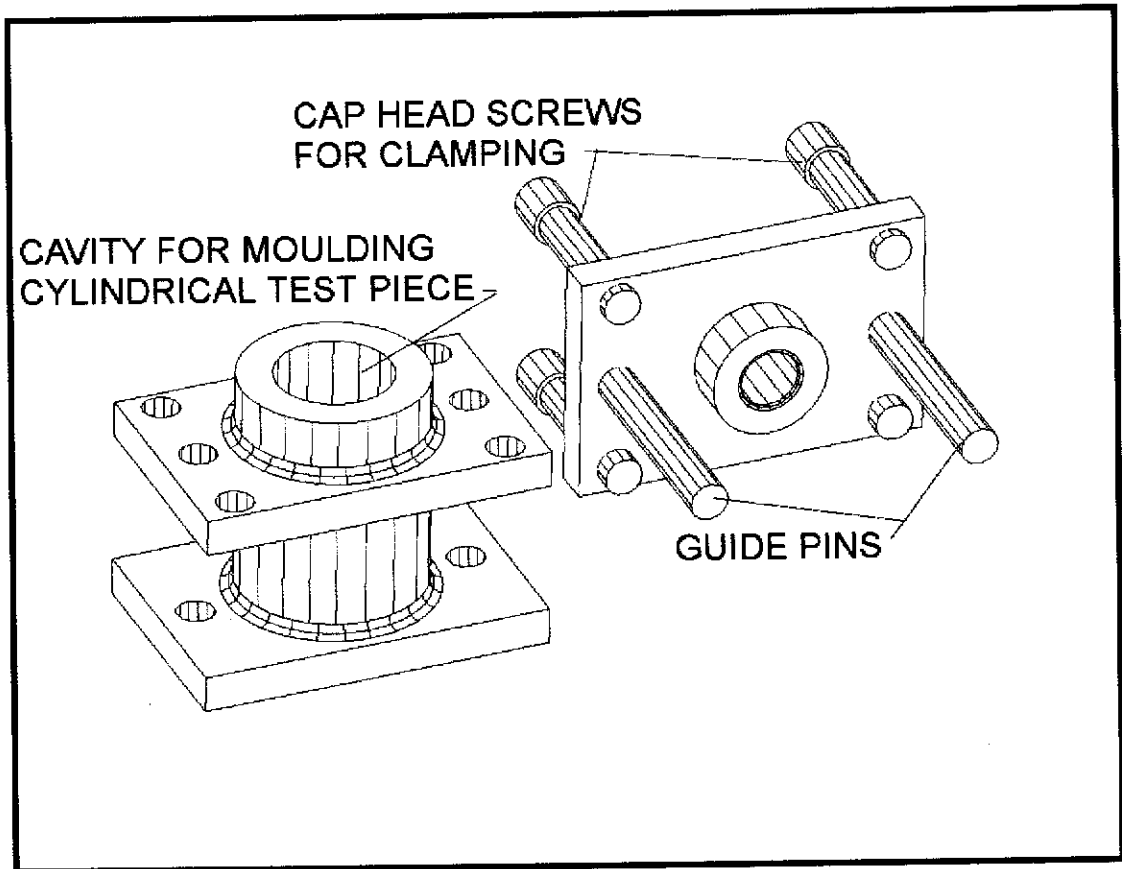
The simple mould manufactured to produce cylindrical test-pieces In the Hysteresis Test Rig.
